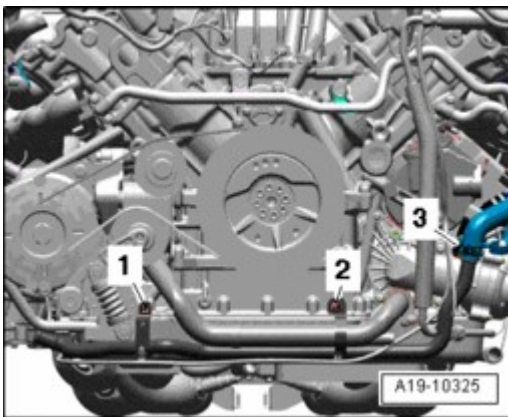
Removing Bolts On Front Lower Coolant Pipe
